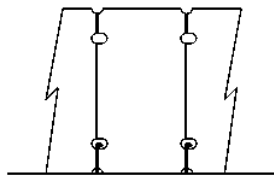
Block assembly methods 4-2a and 4-2b [2], [30]
